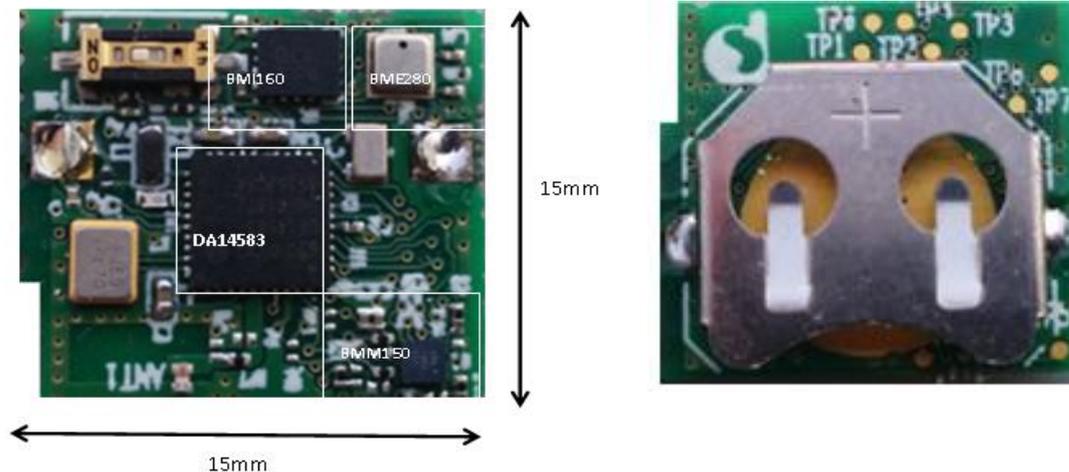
The actual wearable PCBA, top (left) and bottom view (right)
